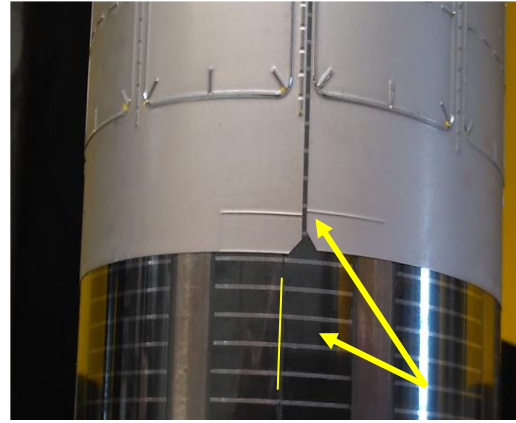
After a short run the die-cut was rotated on the magnetic cylinder [37].
